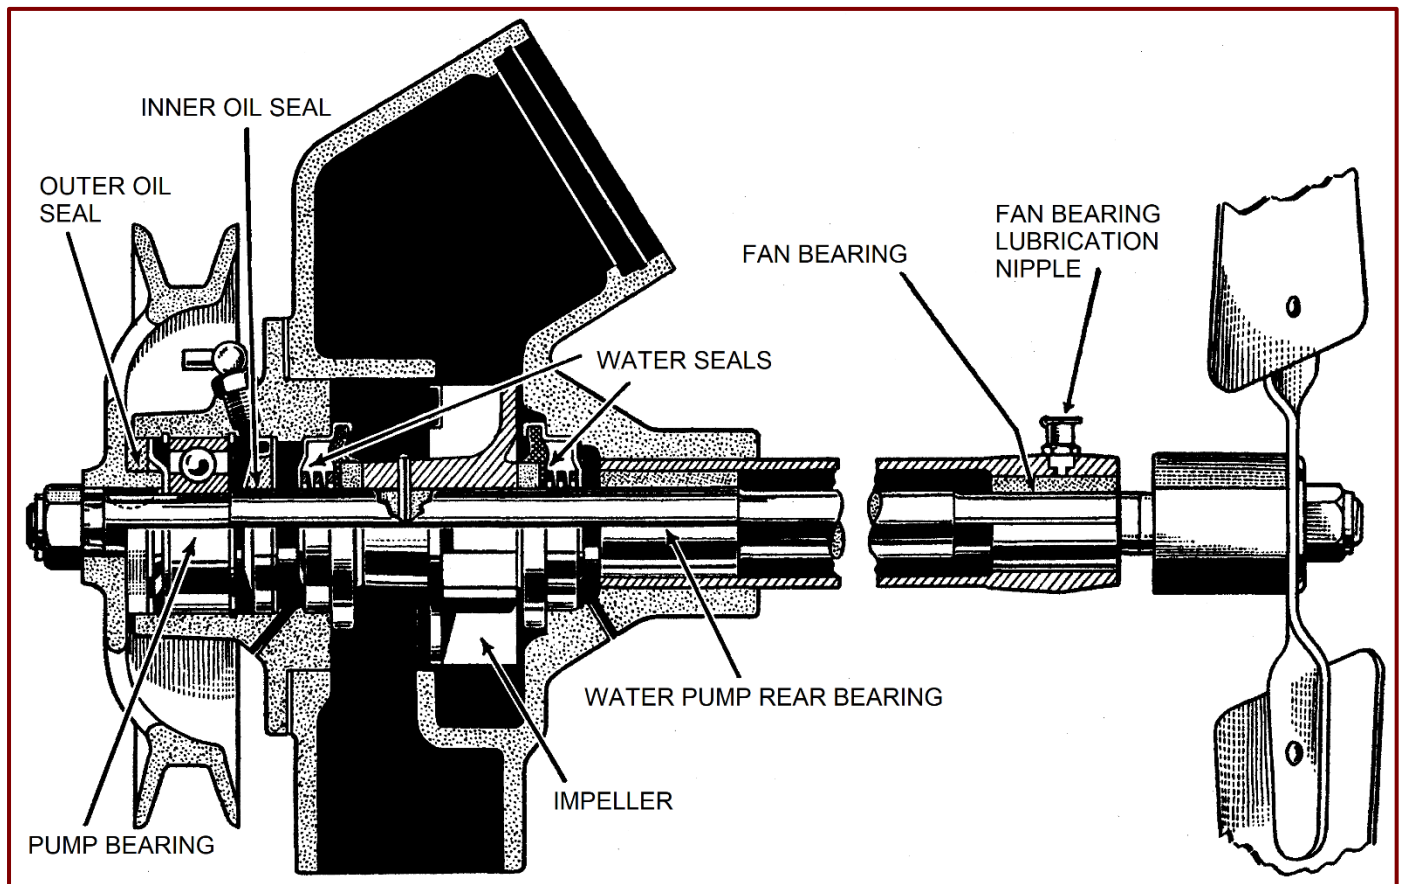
Section Through Water Pump and Fan Spindle Assembly.
